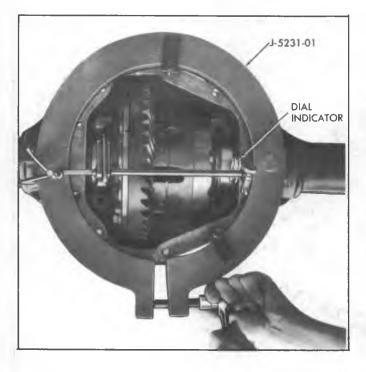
D--Spreader J-5231-01 Mounted on Carrier
